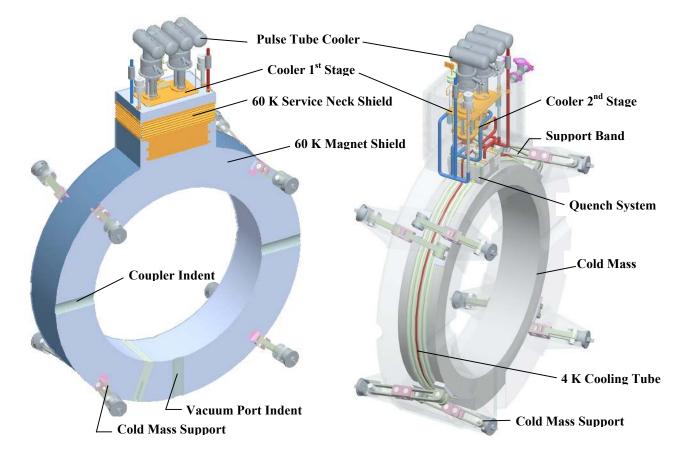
A 3D View of the Coupling Magnet Cold Mass Assembly and the 60 K Shield Assembly (On the left side of the figure is the magnet cold mass with its Shield. On the right side of the figure is the magnet cold mass. Shown as part of the cold mass assembly are the coolers, the leads, and the cold mass supports.)
